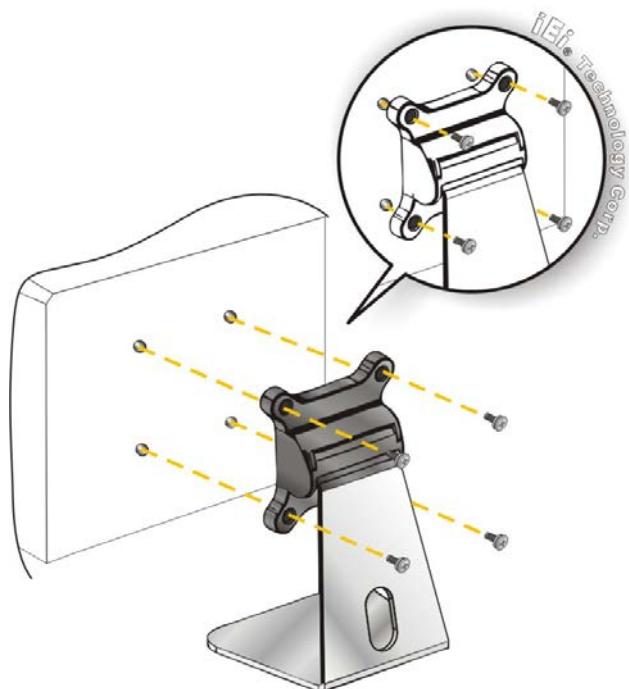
Stand Mounting (Stand-A/Bxx)
